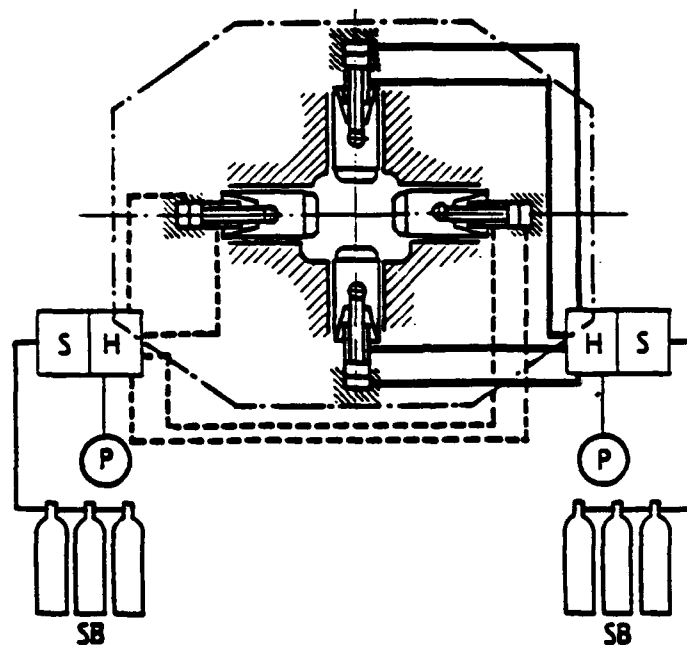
GFM Four Die Radial Forging Machine (Ref. 10).
